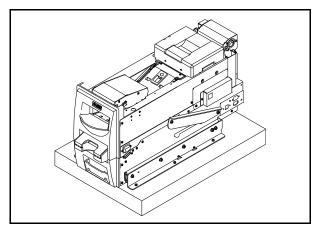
Latch Plate Positioning This completes the RDM-100 Unit Installation.
